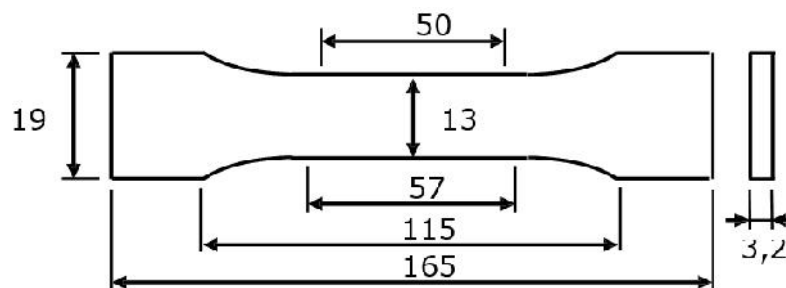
Tensile test specimen size based on ASTM D638-03, the dimension in mm.
